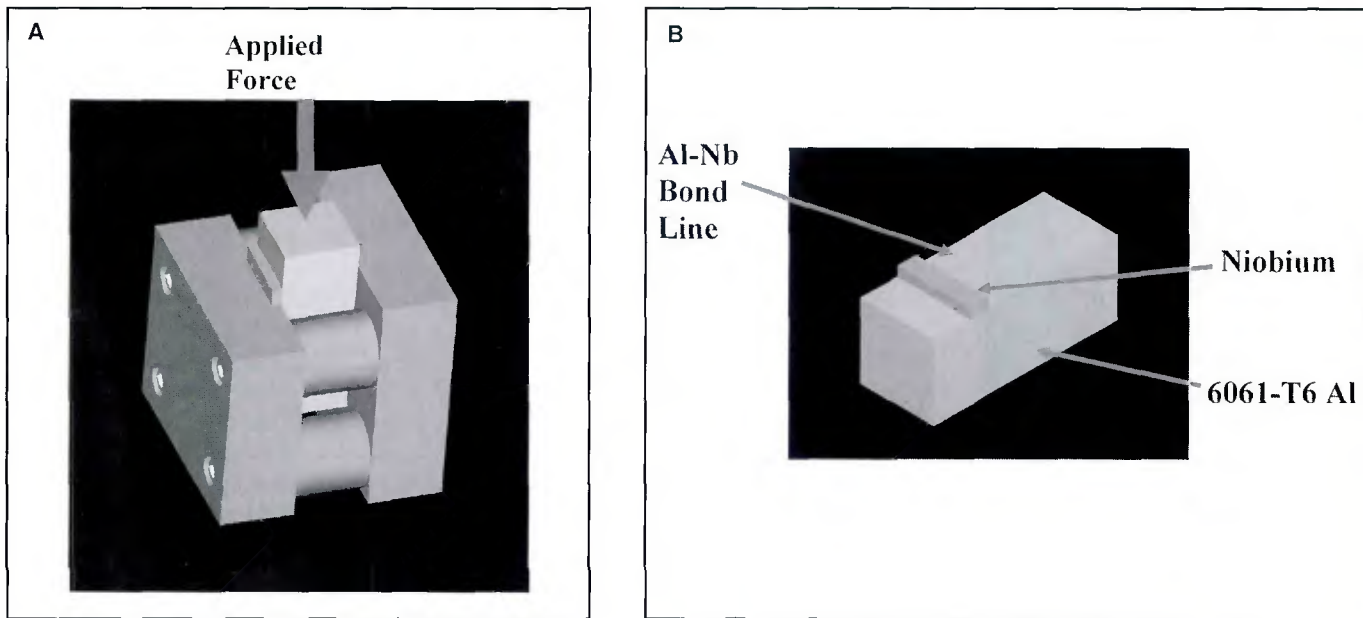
Schematic diagrams. A — The shear testing setup used to measure the shear strength of the Al-Nb explosion weld; B — the shear strength specimen.
